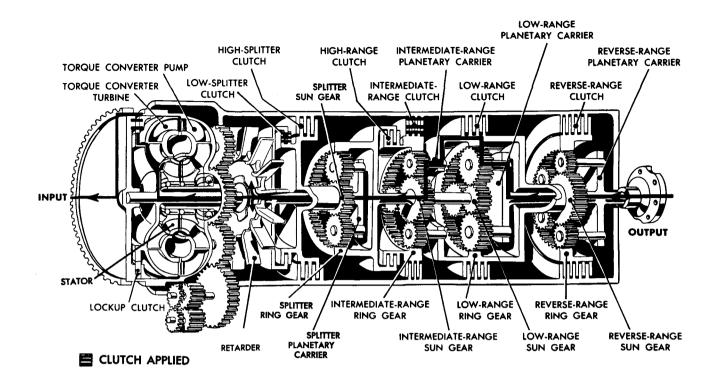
Hydraulic retarder operation, second gear (5640, 5840), third gear (5660, 5860)-torque path
